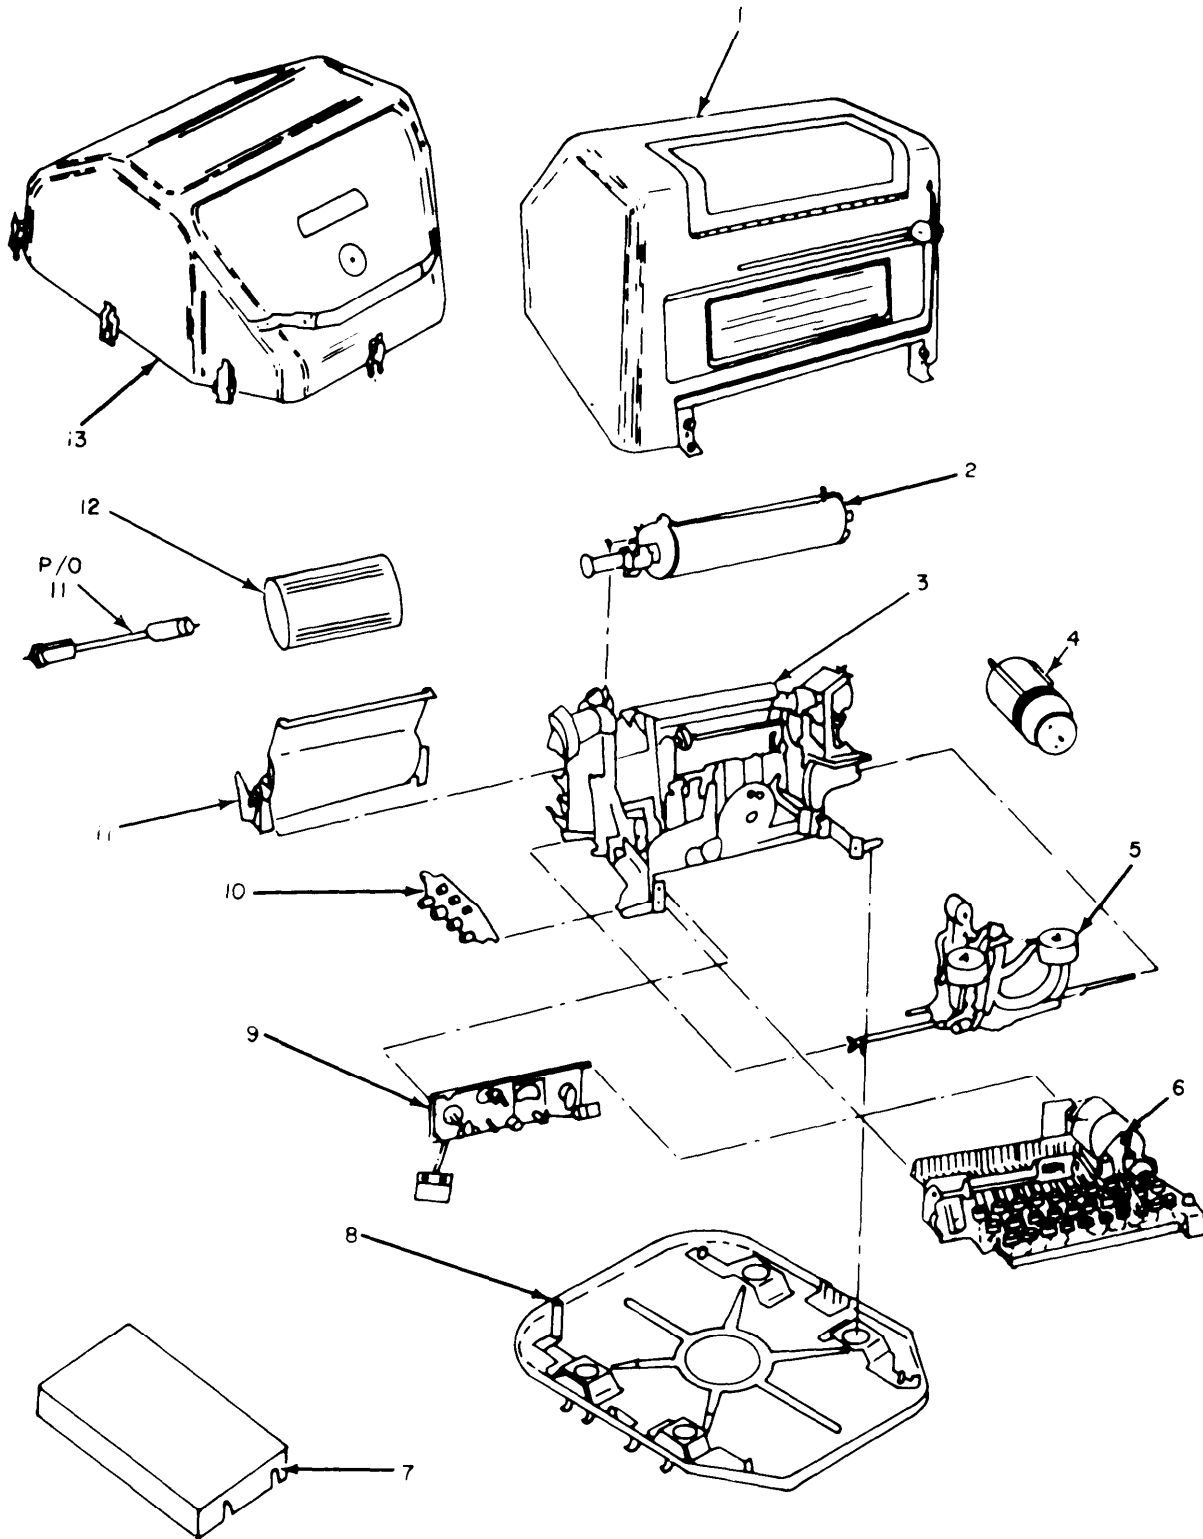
Paper Through Assembly, Teletypewriter TT-335/TG
